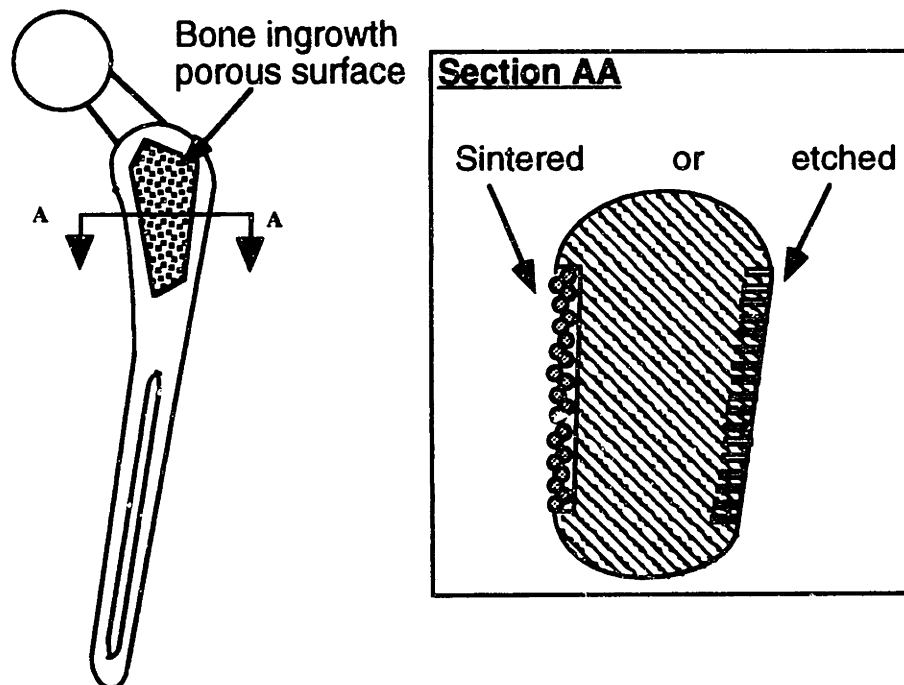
Example of an orthopaedic hip prosthesis with bone ingrowth surface texture shown in the section a) sintered beads, b) etched or EDM Electrical discharge machining.
